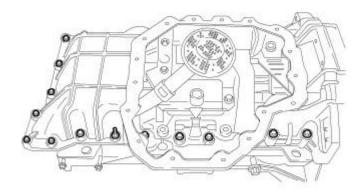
Engine Block Gasket Surface Courtesy of CHRYSLER LLC
